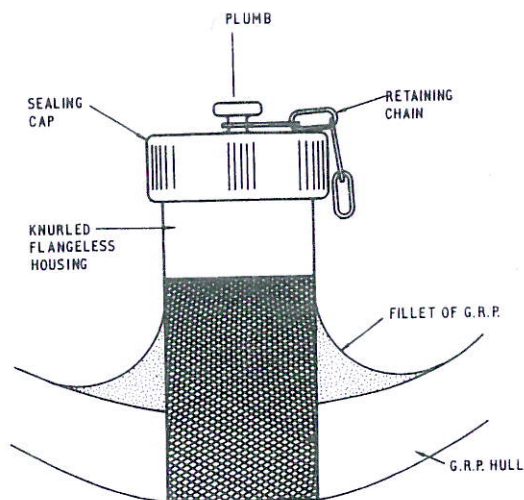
INSTALLATION OF FLANGELESS HOUSING THROUGH
